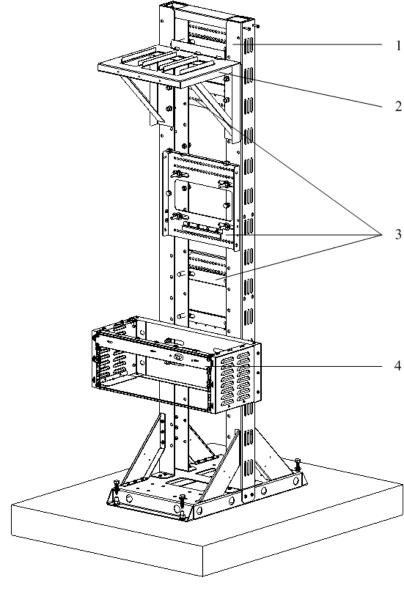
SUPPORTING BRACKET AND WALL-MOUNT ASSEMBLIES
